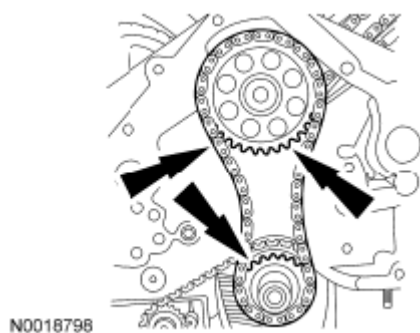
Locating Jackshaft, Crankshaft Sprockets And Chain
